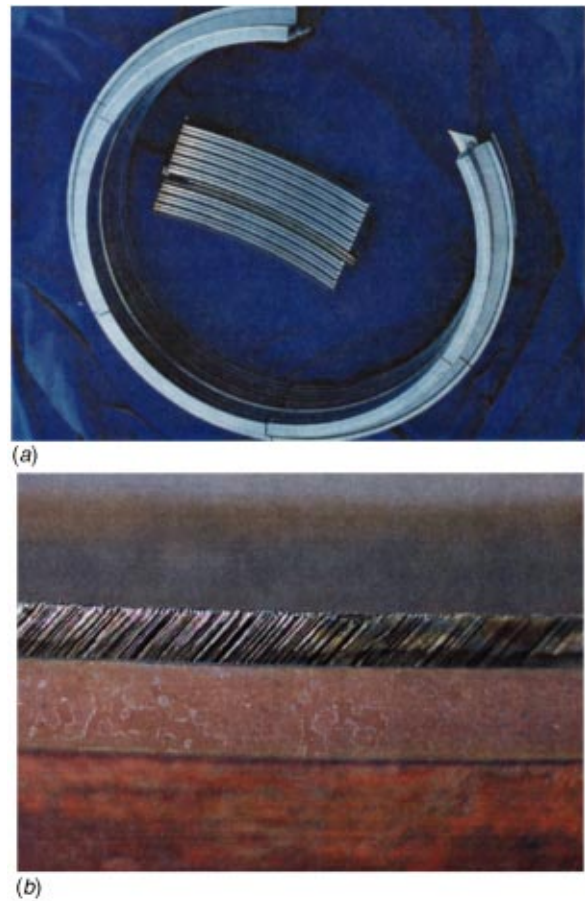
(a) Typical steam turbine brush seal packing ring assembly. (b) 7EA gas turbine HPP brush seal after 22,000 h of operation.
